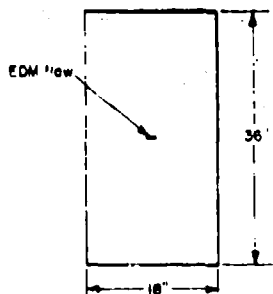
SHEET FRACTURE TOUGHNESS SPECIMEN
